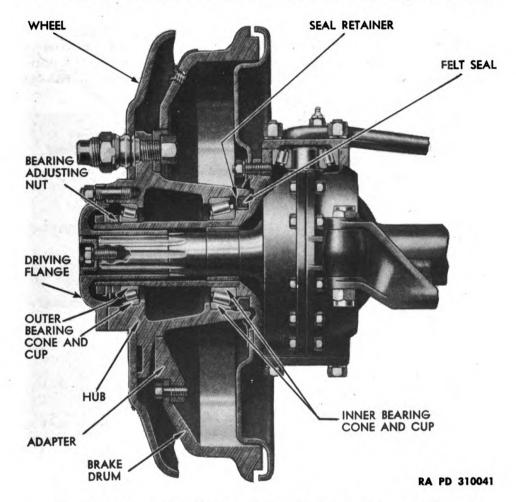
Front Wheel, Hub, and Drum Cross-sectional View (6 x 6) (Demountable-type Drum)
